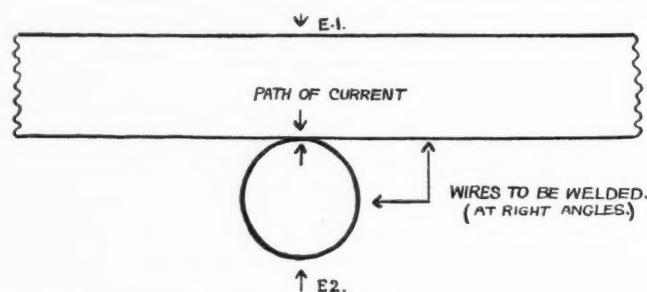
Diagram showing path of welding current between two pieces of wire to be welded.
